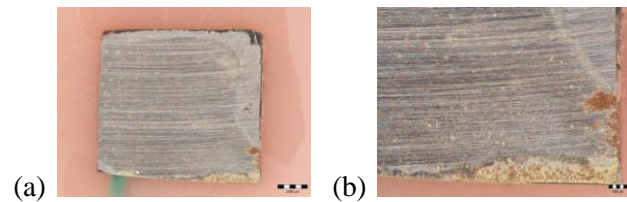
Stereomicroscopic aspects on the surface of the P4 sample after corrosion testing
